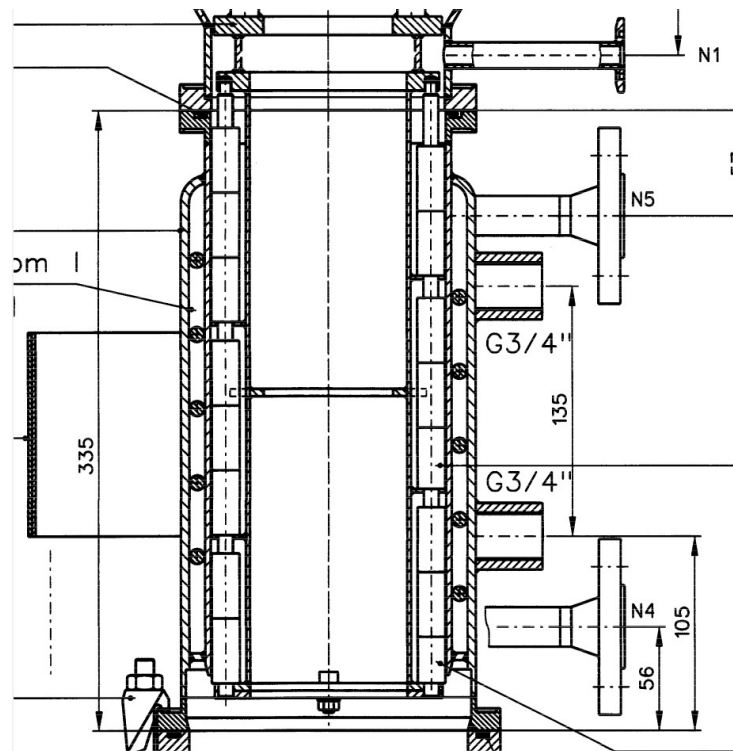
Extract of the assembly drawing of the thin-film evaporator. Inside the wiper basket the wiper blades are connected to a rotor
